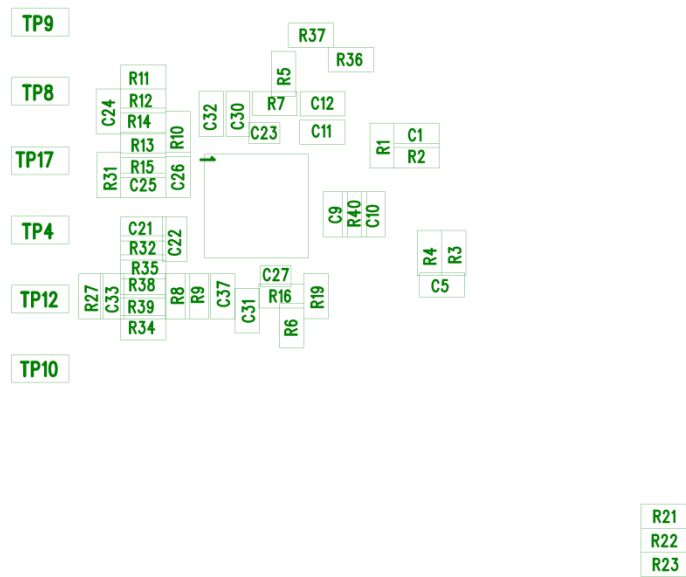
PWR091 EVM Bottom Assembly Drawing (Bottom view)
